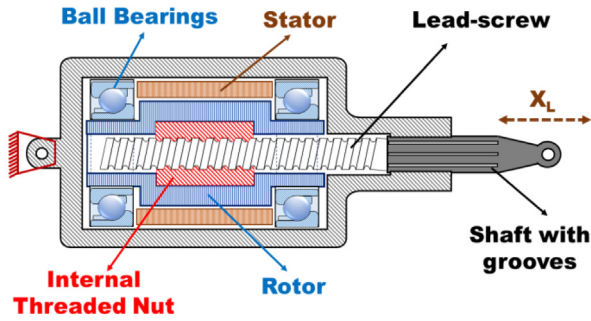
The cross-sectional view of a direct-driven linear EMA.
